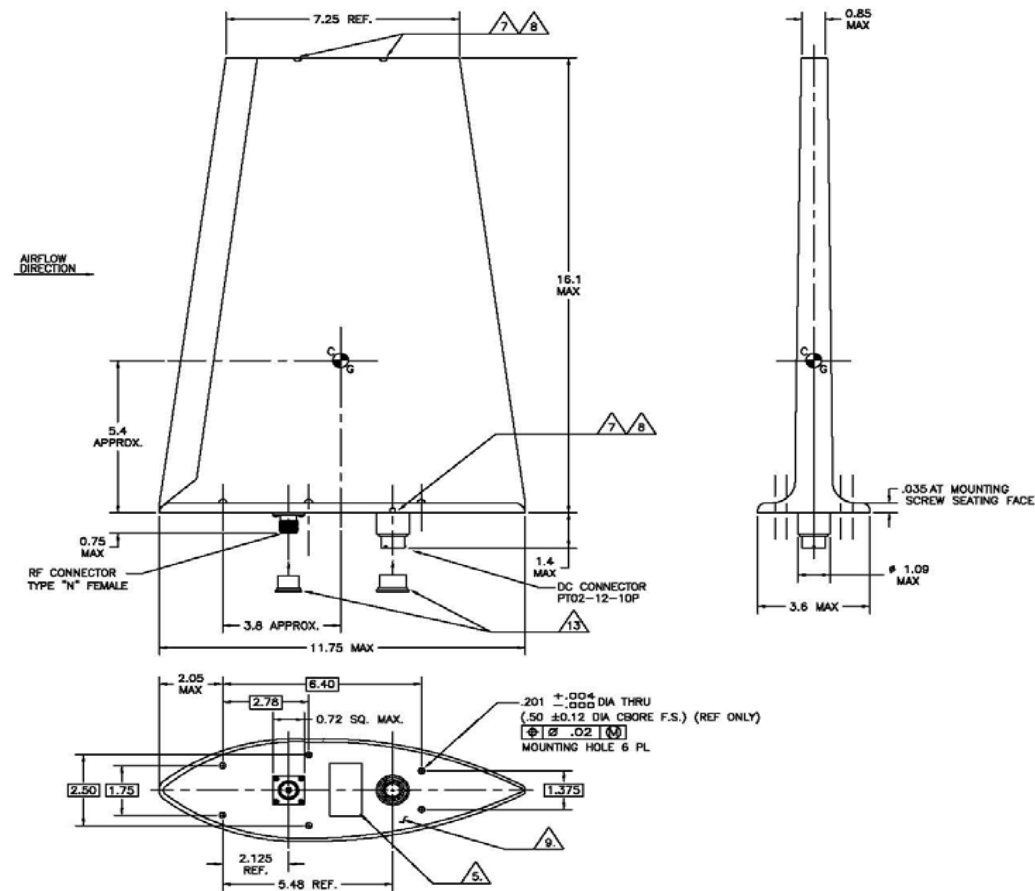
AT-50 Envelope Drawing (Sheet 1 of 1)
